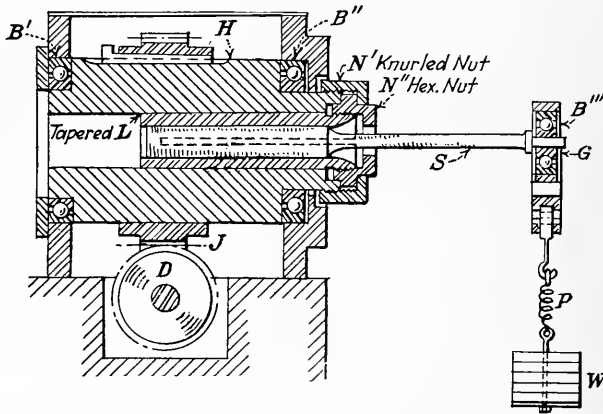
Diagram of rotating cantilever beam-type testing machine. (McAdam.)
